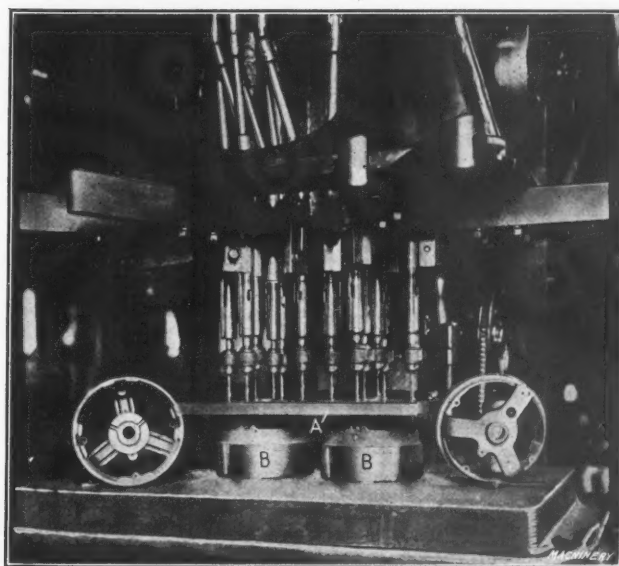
Drilling Two Alternating-current Motor Bodies in a Pratt & Whitney Multiple Drilling Machine at the Same Setting
